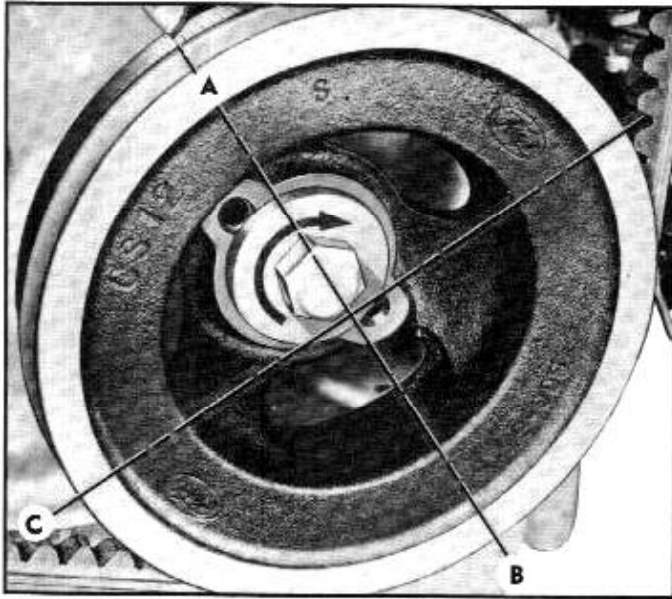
C-29—Quadrant for Valve Clearance Adjustment — Typical
